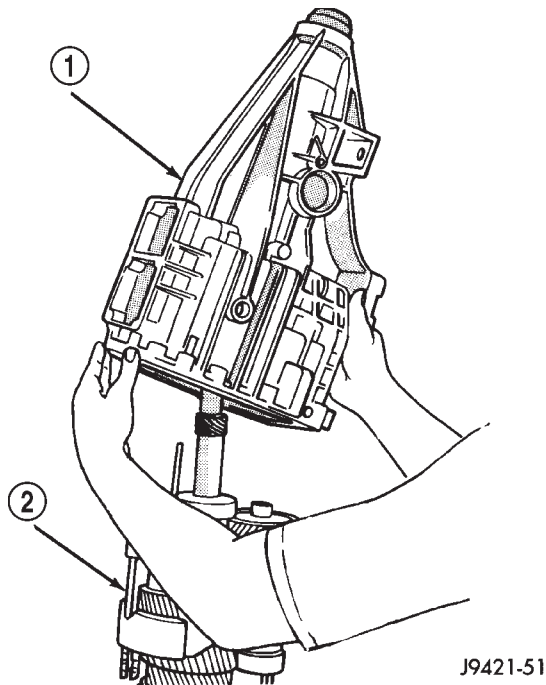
Unseating Rear Housing From Output Shaft Bearing—2WD
